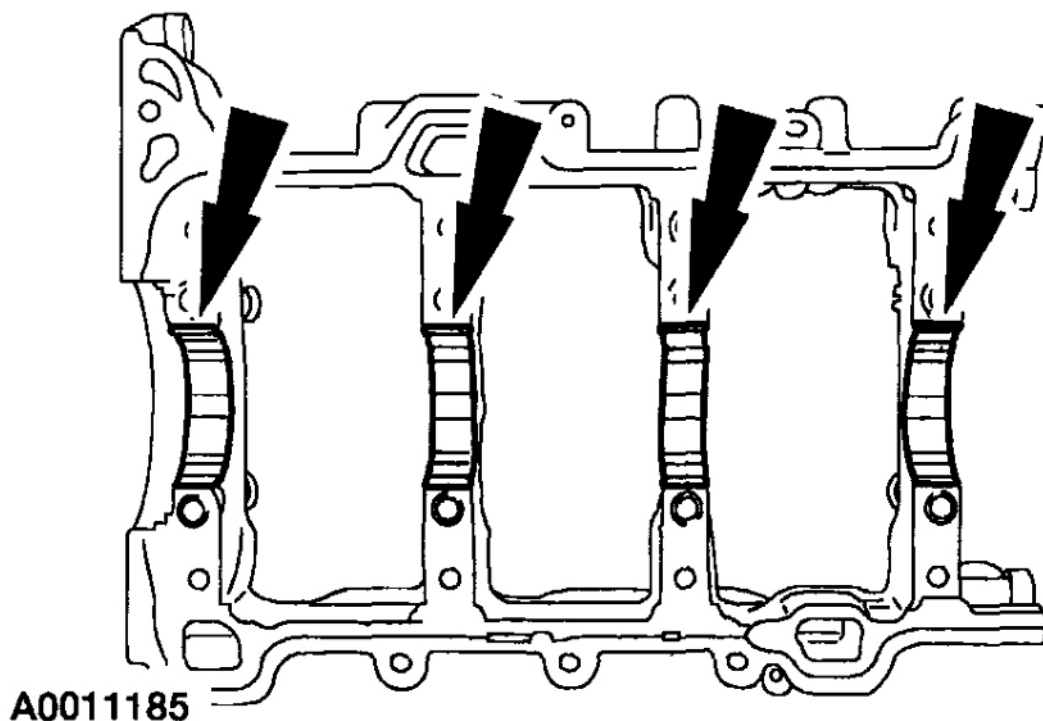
Removing/Installing Lower Crankshaft Main Bearings At Lower Cylinder Block
